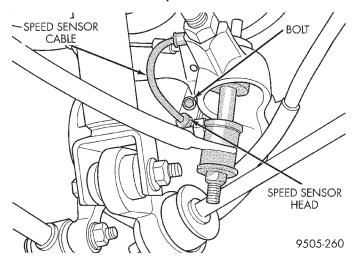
Rear Speed Sensor Head Attachment To Brake Support Plate
